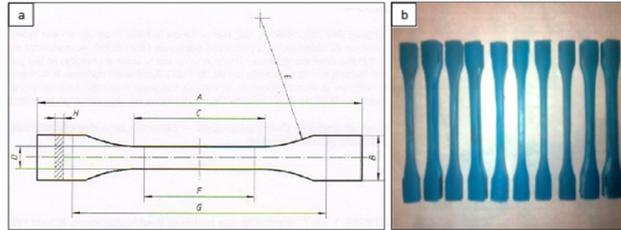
a) Dimensions of specimens, b) Eight specimens.
